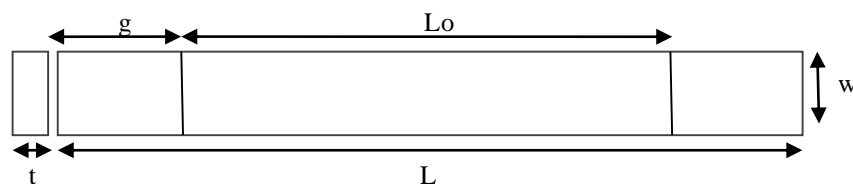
The overall dimensions and layout of the UD/CFRP tensile test specimen.
